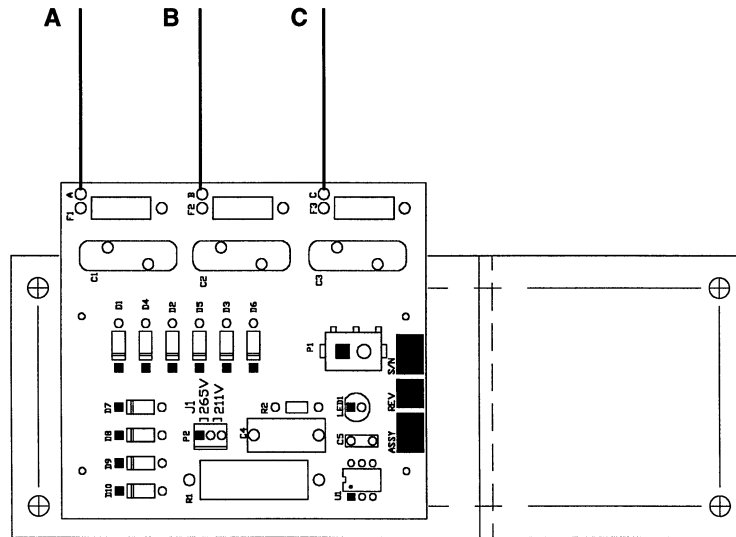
Mounting Phase Loss Detection PCB on Circuit Board Supports
